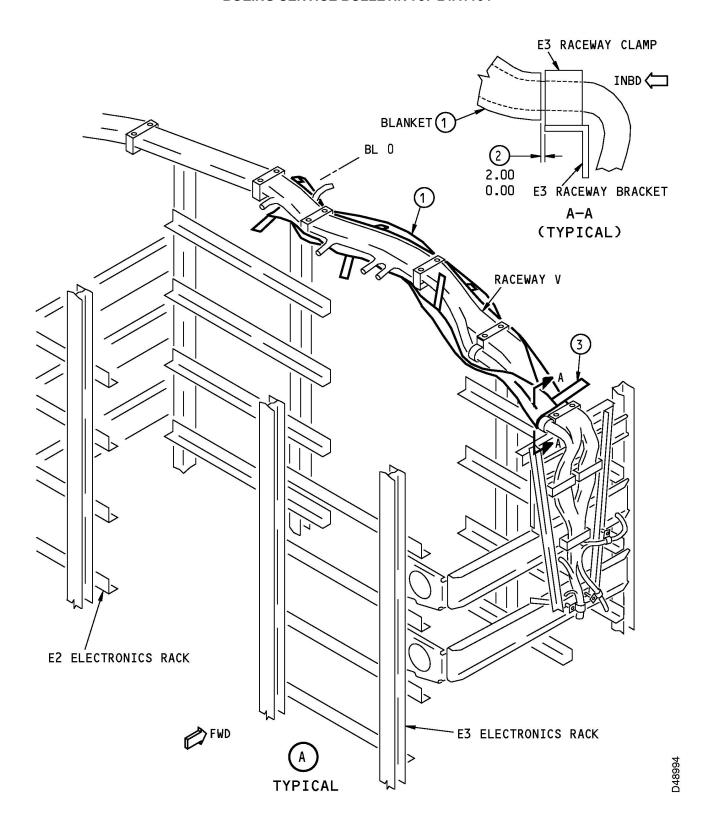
ATTACHMENT OF THE FIRE PROTECTION BLANKET (SHEET 2 OF 3)
